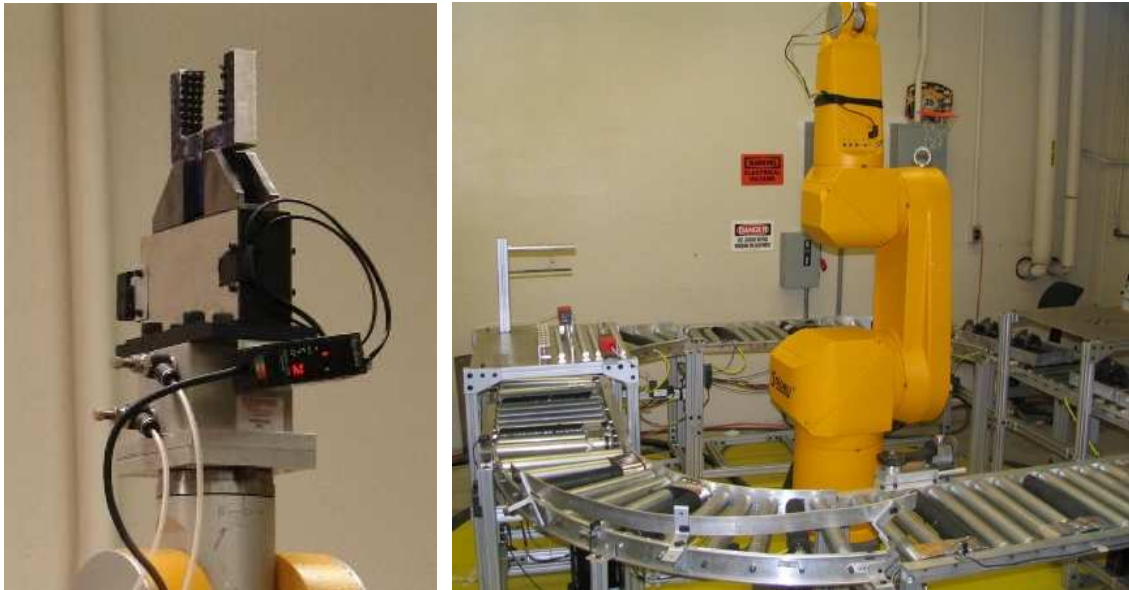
Staubli RX-130 industrial robot with (a) end effect gripper for part manipulations, and (b) conveyors in enclosed manufacturing cell
